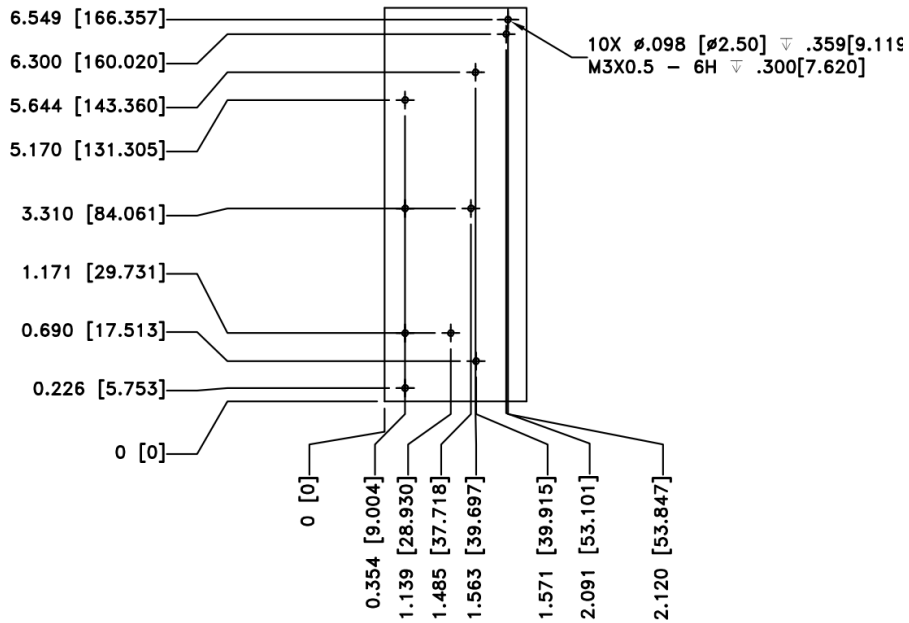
Outline drawing of the HSK-2425-250+ heat sink, the exact locations of the screw holes are shown
